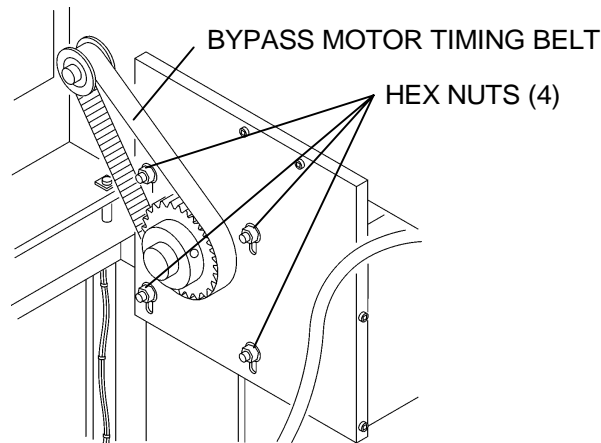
Installing and adjusting the Bypass Motor Timing Belt
